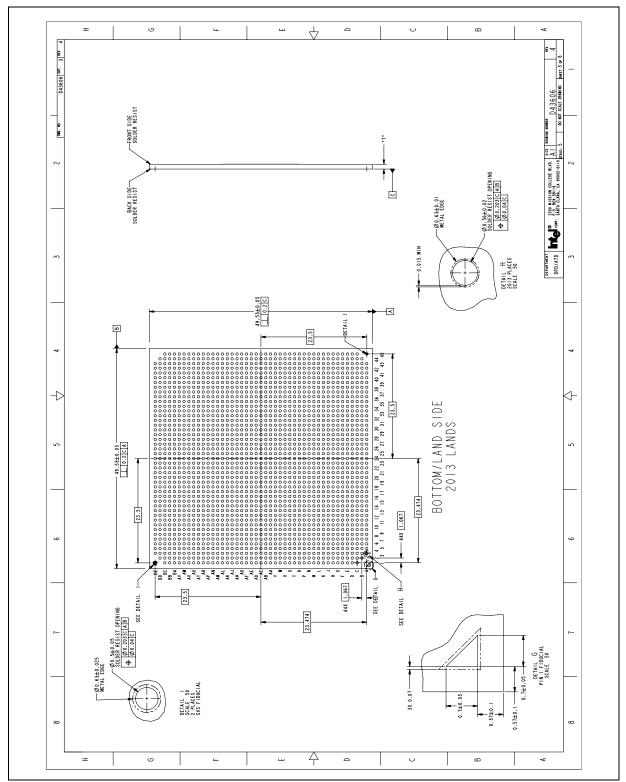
Intel® 7300 Chipset MCH Package Drawing (Sheet 2 of 2)
